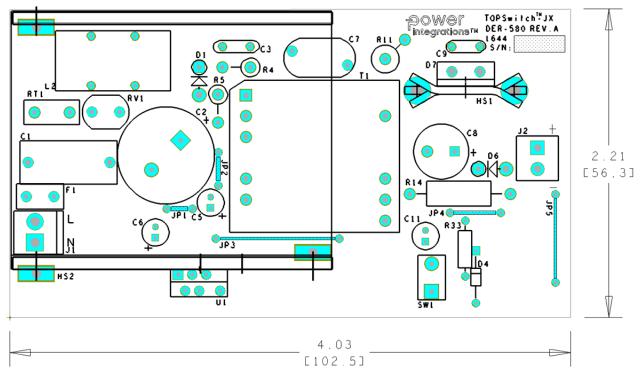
Printed Circuit Layout, Showing Top Side Components.
